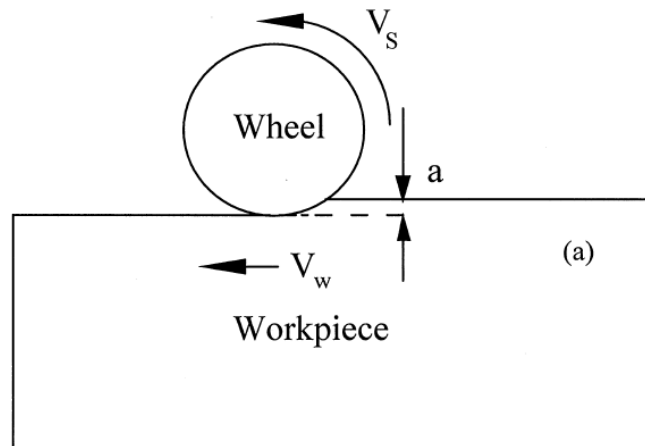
The movement of grinding wheel on the workpiece (Moulik et al., 2001)
